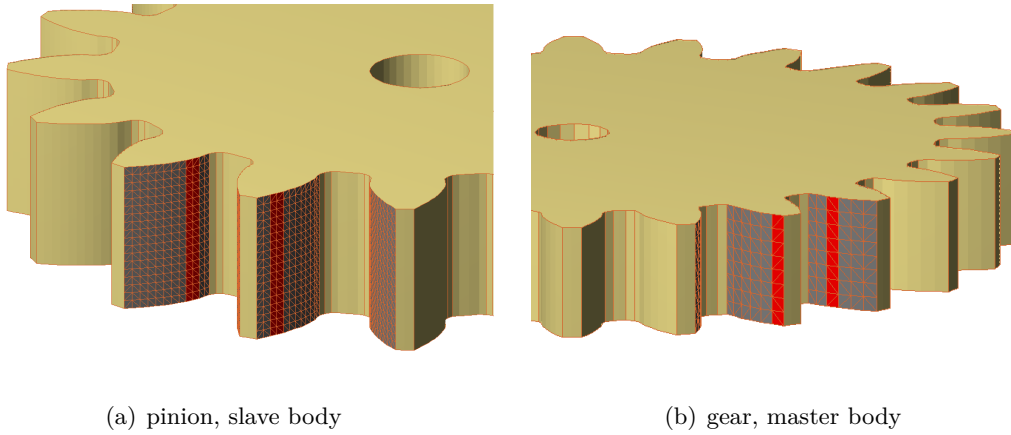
Zone of tooth flanks in contact (in red) when there are two teeth simultaneously in contact. The candidate contact zones are the full tooth flank surfaces (in gray).
